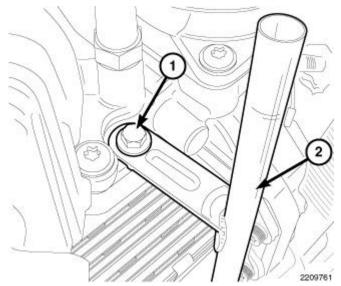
Oil Level Indicator Tube Courtesy of CHRYSLER LLC
